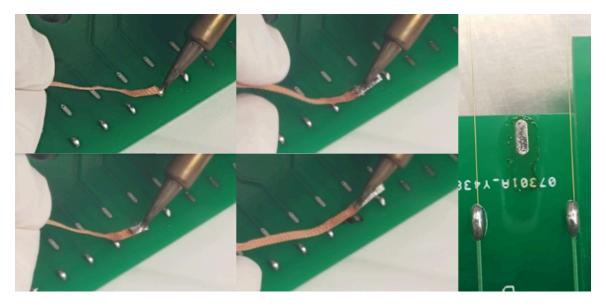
Highlights of the solder removal process. Slowly slide the copper wick and iron tip over the joint to absorb the solder. Notice the flux residue after removal.
